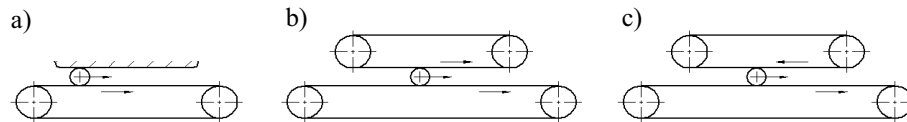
Diagram of forming dough pieces into cylindrical shapes
